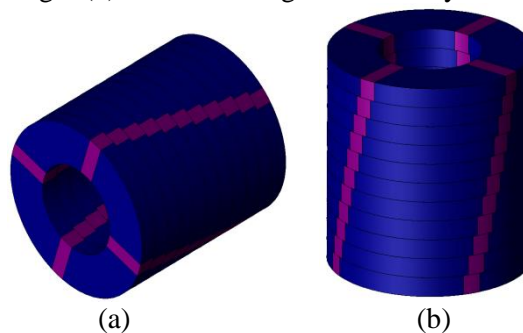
Skewing rotor model a) Isometric view b) Rotor top view
